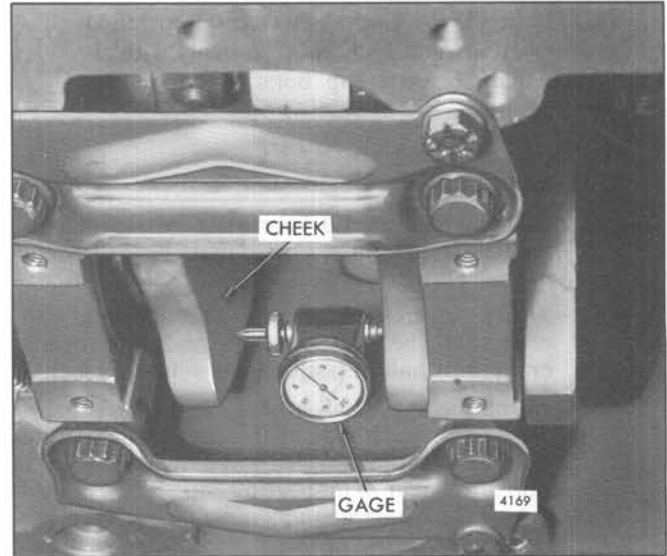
Crankshaft Distortion Measuring Gage Mounted on Crankshaft
